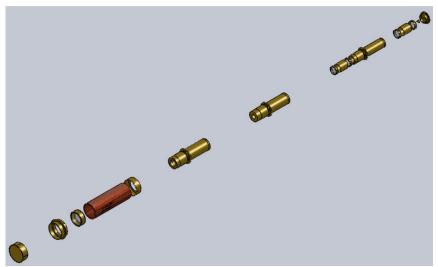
Isometric exploded view. See drawing for further detail of exploded view.
